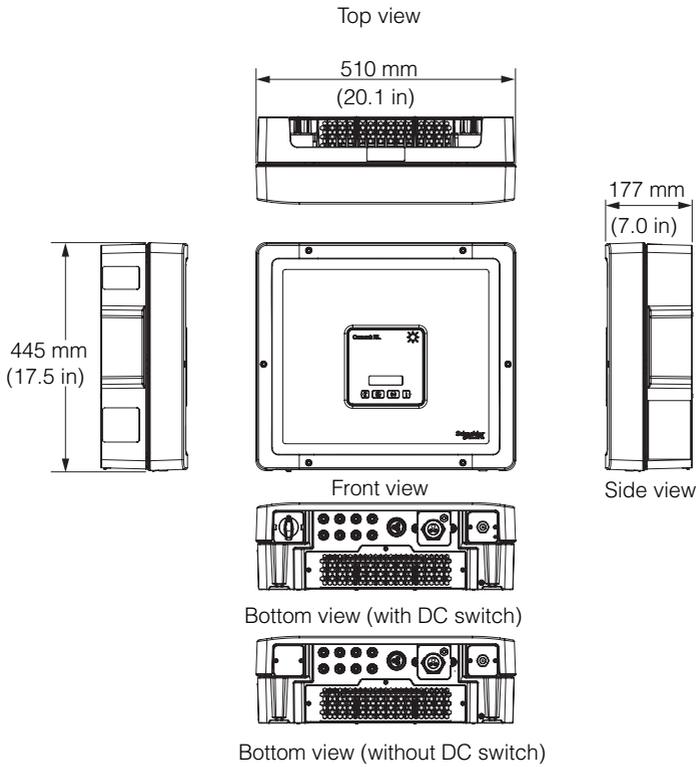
Views and dimensions of Conext RL 5000E-S/ 5000 E
